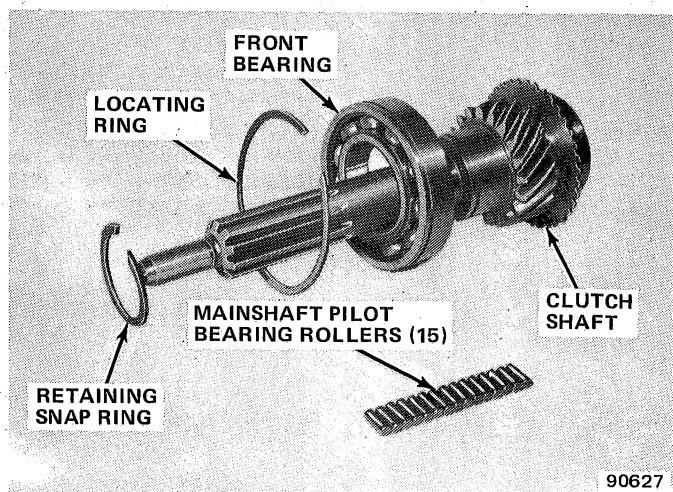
B-54 Clutch Shaft and Front Bearing Assembly
